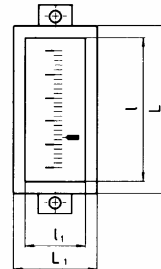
= contact-making gauge (Fig. 101 with contacts, rear cable inlet)
